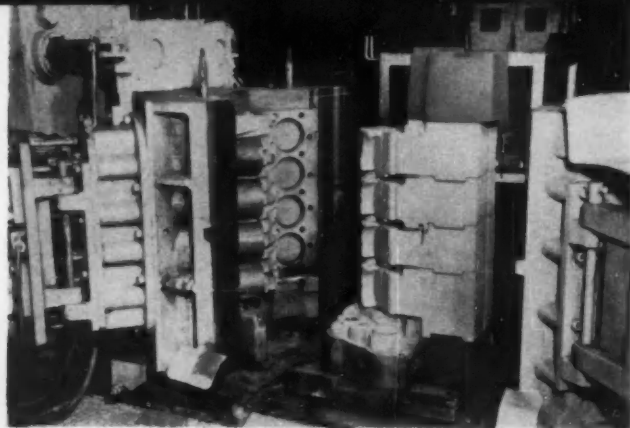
Removing V-8 engine block casting from semi-permanent mold.
